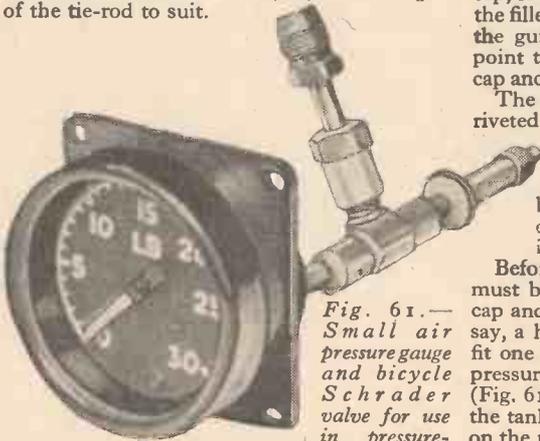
Small air pressure gauge and bicycle Schrader valve for use in pressure-testing the tank for leaks.
